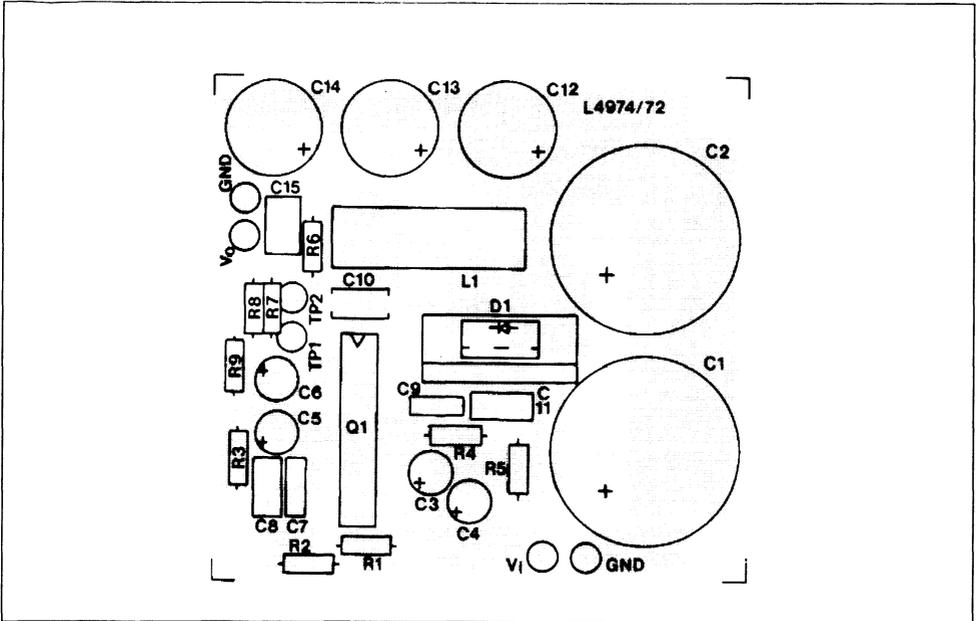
P.C. Board and Component Layout of the circuit of fig. 33. (1: scale)
